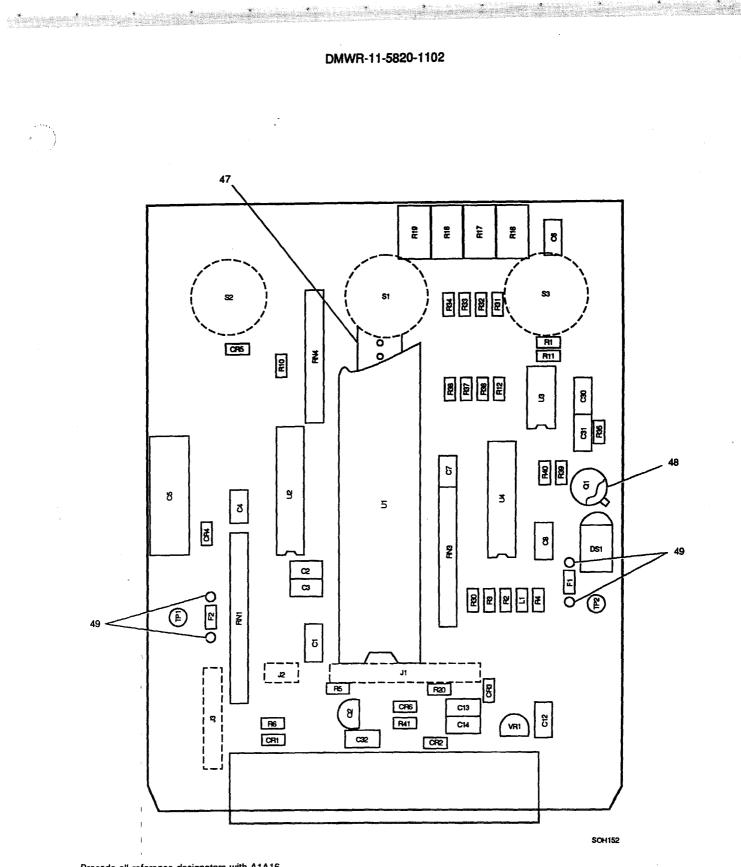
A16 Front Panel Board Assembly (Sheet 1 of 2)
